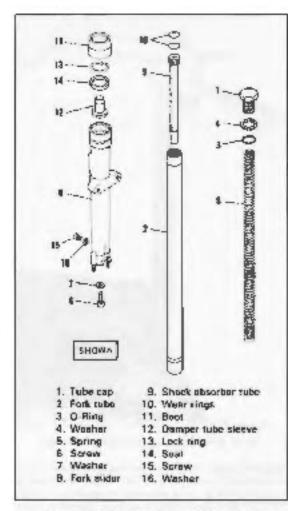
FX Front Fork - 1976 to 1978 -Exploded View
